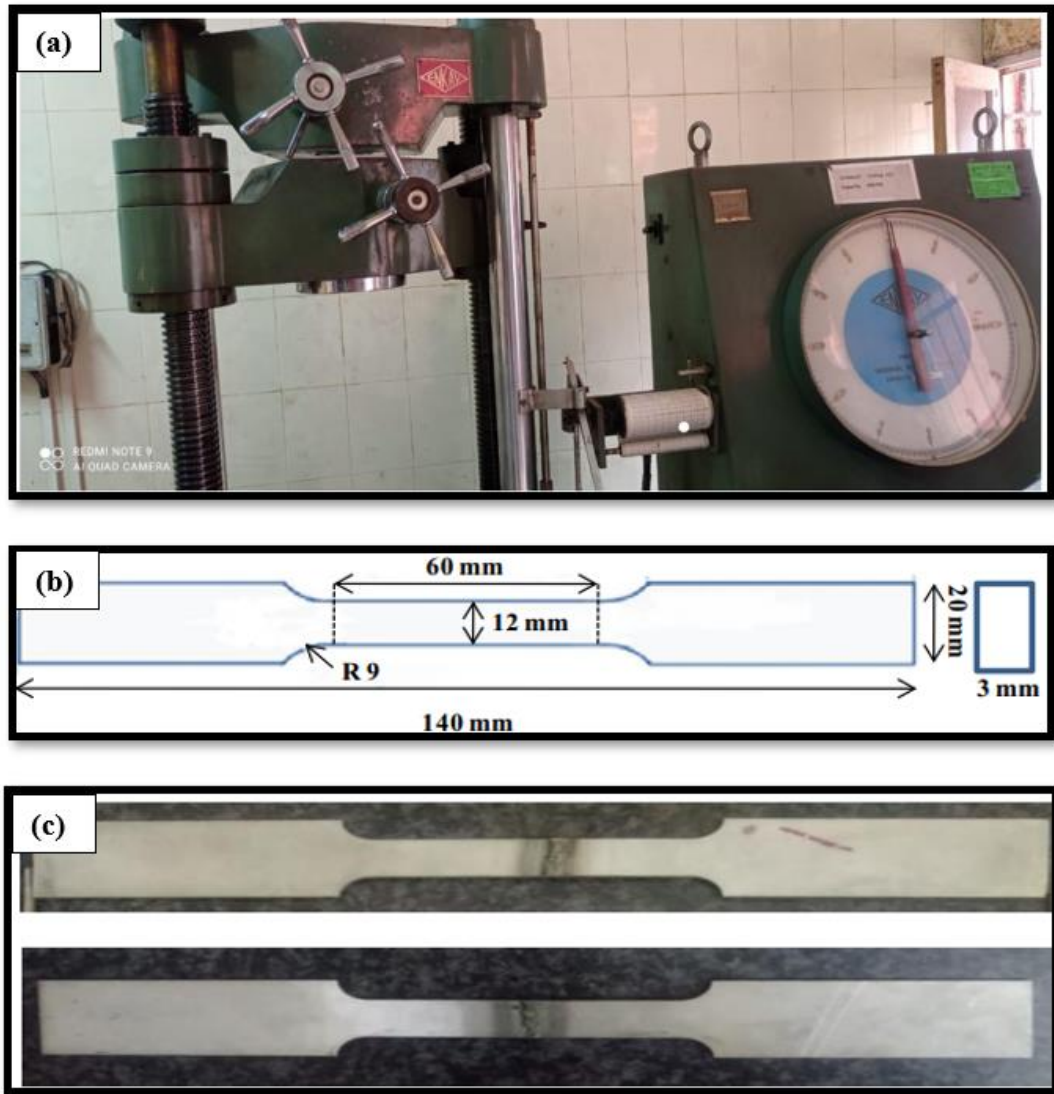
(a) Universal Testing Machine Used to Conduct Tensile Test (b) Schematic Diagram of The Tensile Test Specimen as Per ASTM E8 Standard (c) Actual Specimens
